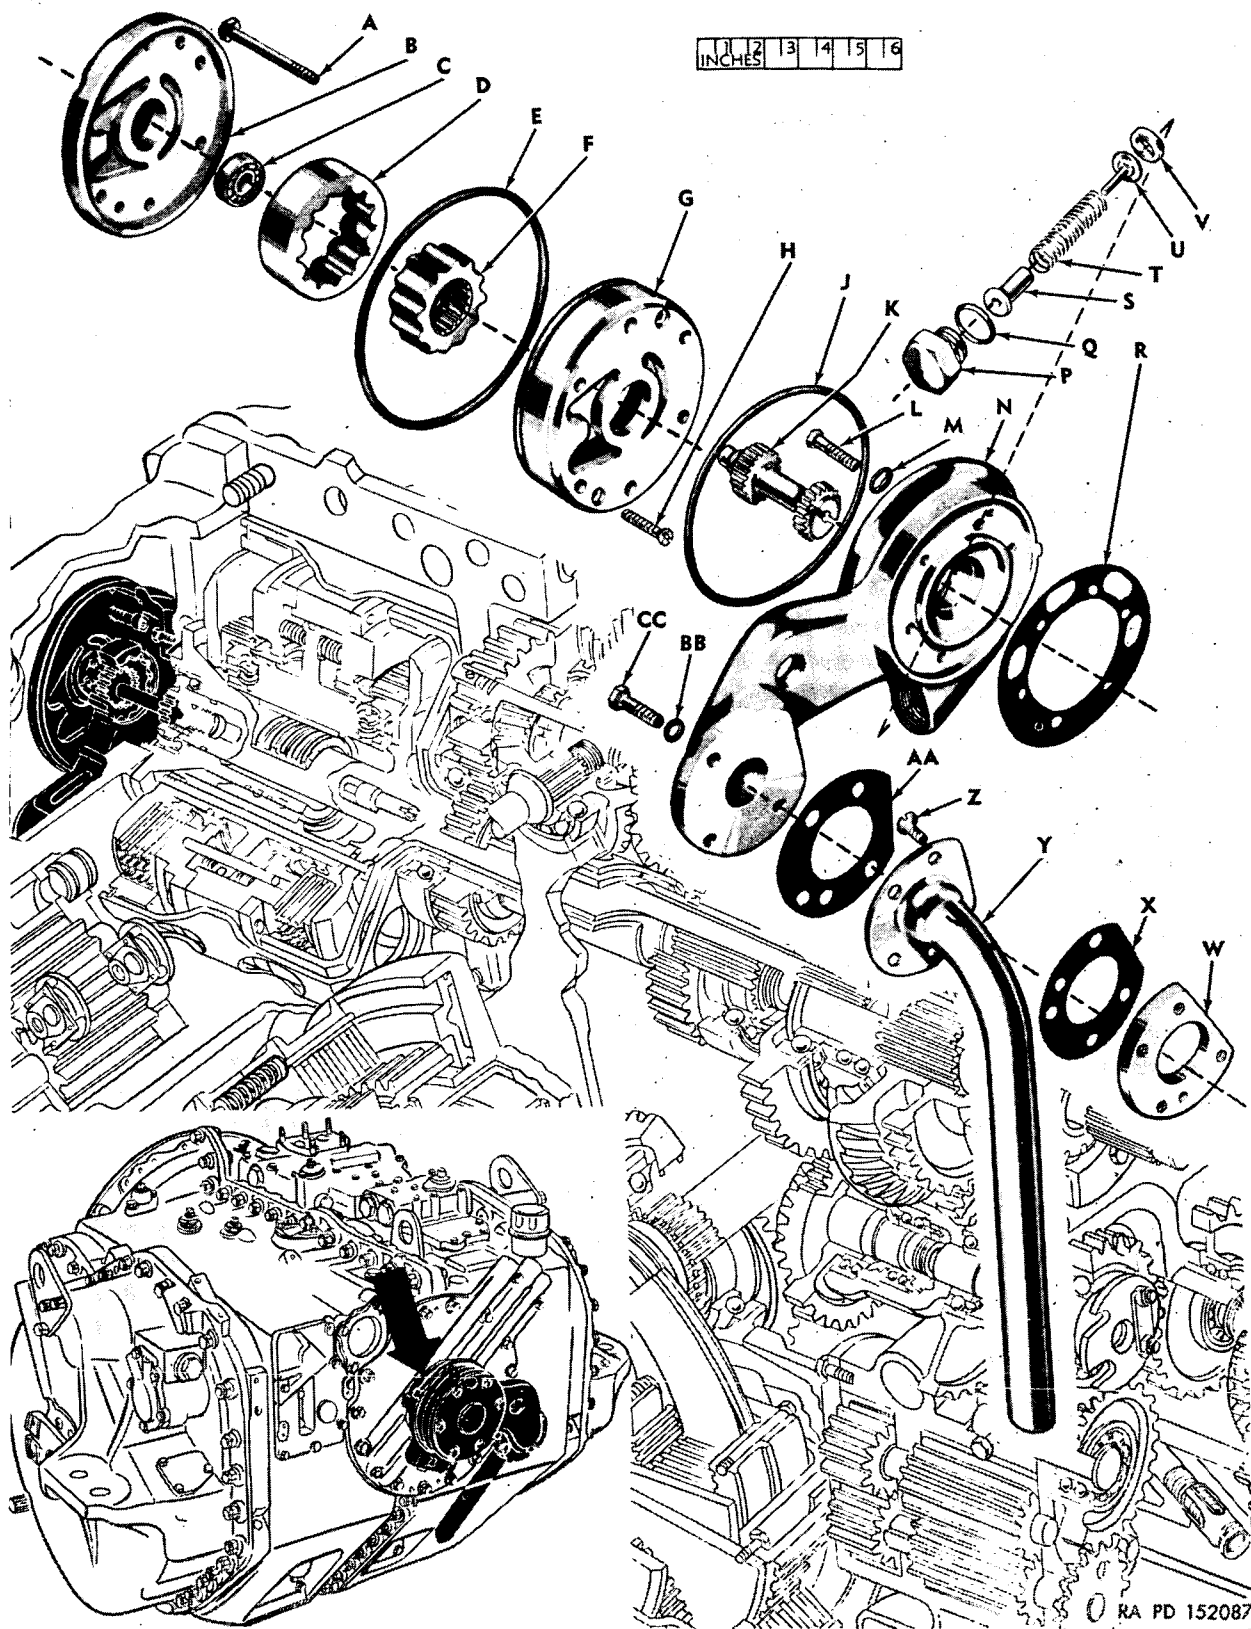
Steering-clutch coolant pump, manifold, regulator valve and pick-up tube—exploded view.
